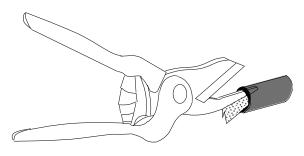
Using Tabbing Shears to Cut Slit in Cable Jacket
